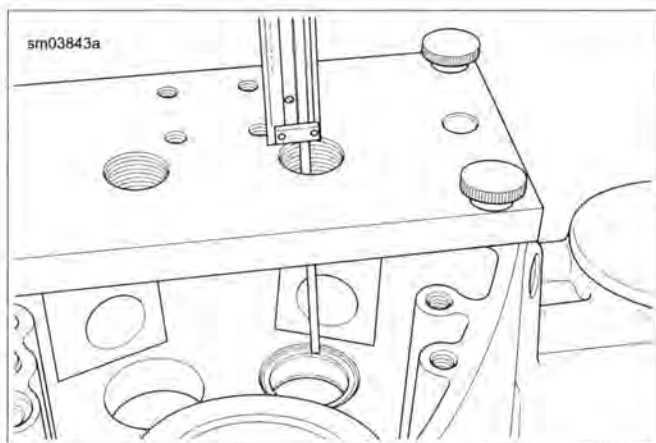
Measure from Top of Support Plate to Edge of Needle Bearing
